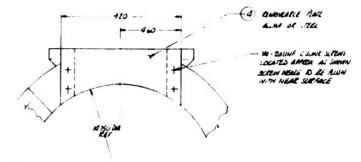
Shell Mold Assembly - Helicopter Transmission Housing (WRD Drawing No. 4695).
